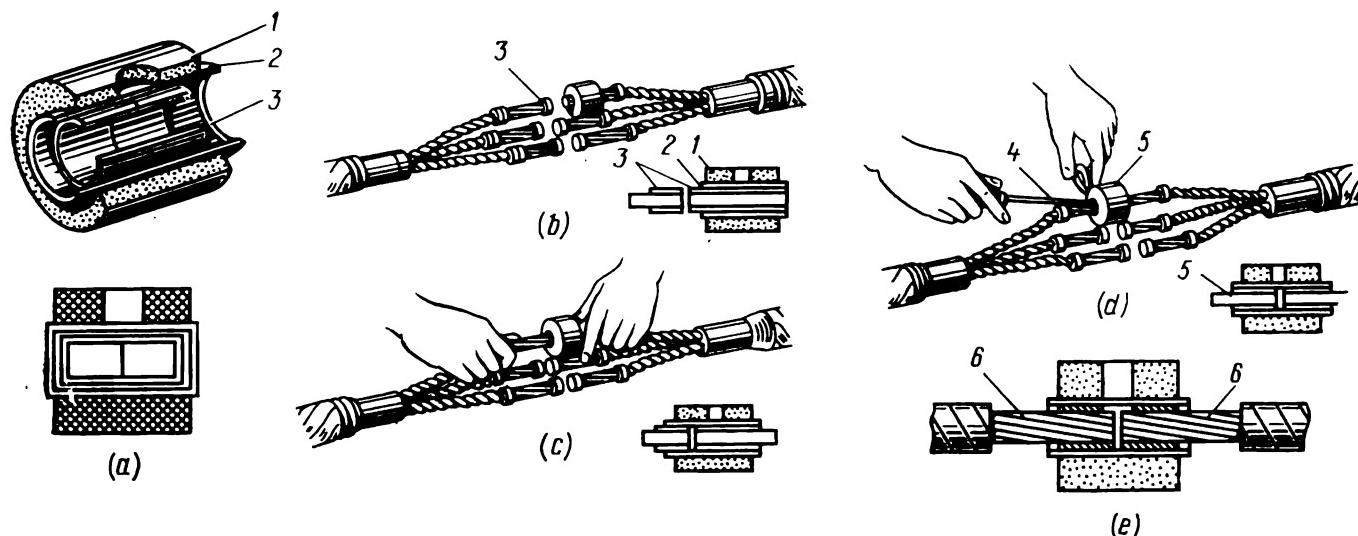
Preparing aluminium conductors for welding in a thermit cartridge
